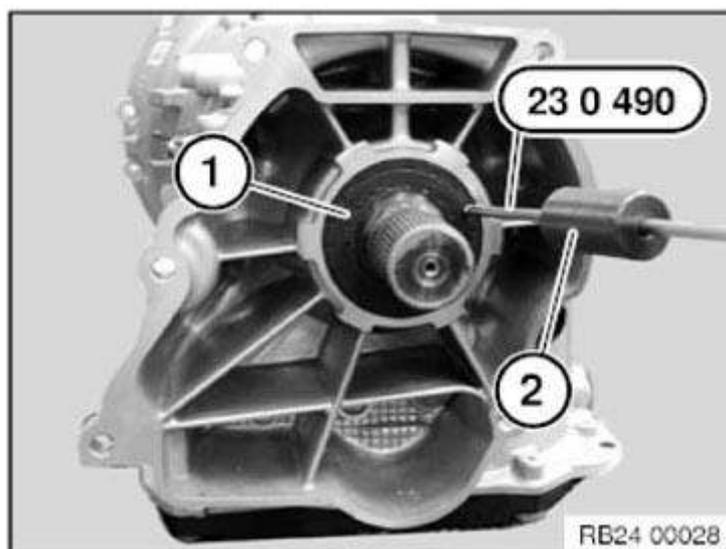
Drilling Hole Into Radial Shaft Seal Using Center Punch
